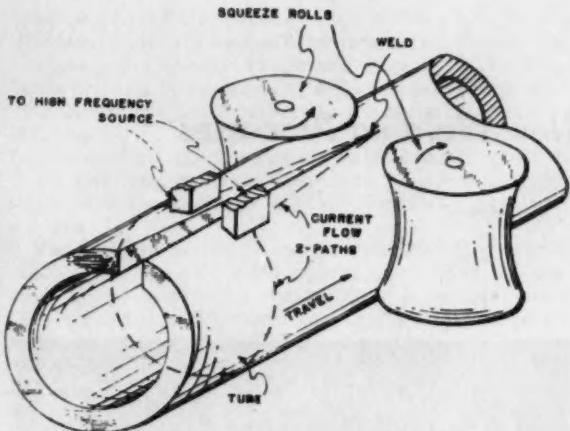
High frequency resistance welding equipment for tube welding.
